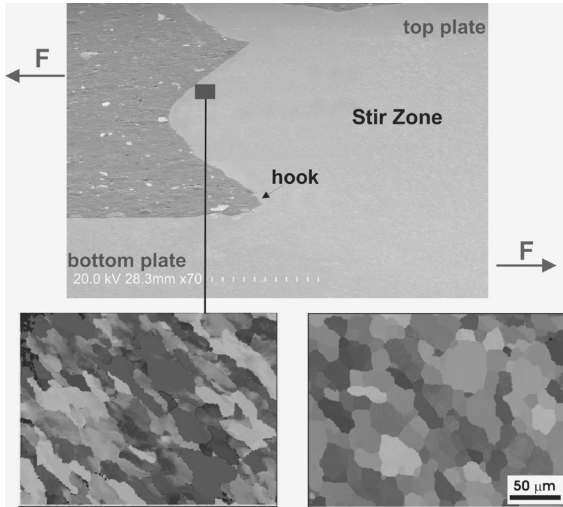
Cross section of an A6060 tested sample (top) and EBSD orientation maps (bottom), bottom-left taken next to fracture surface and bottom-right away from the fracture surface in SZ
